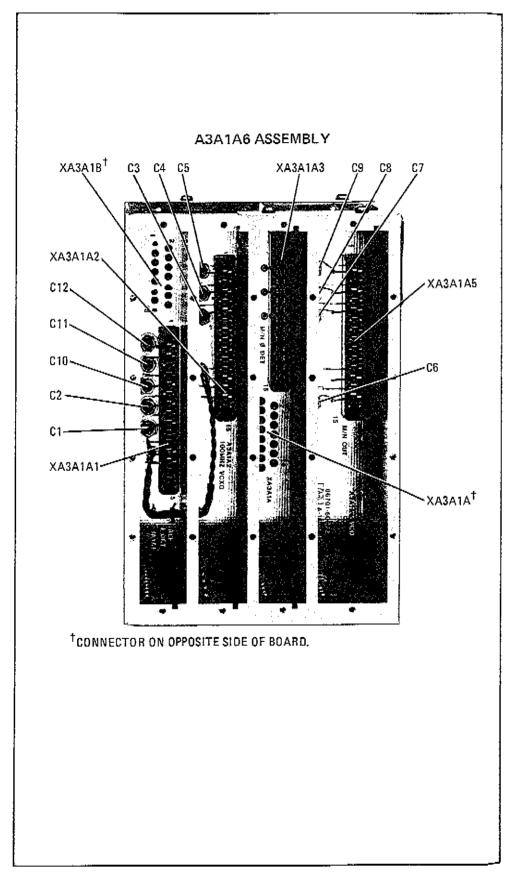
A3A1A6 Reference and M/N Motherboard Assembly Component and Connector Locations
